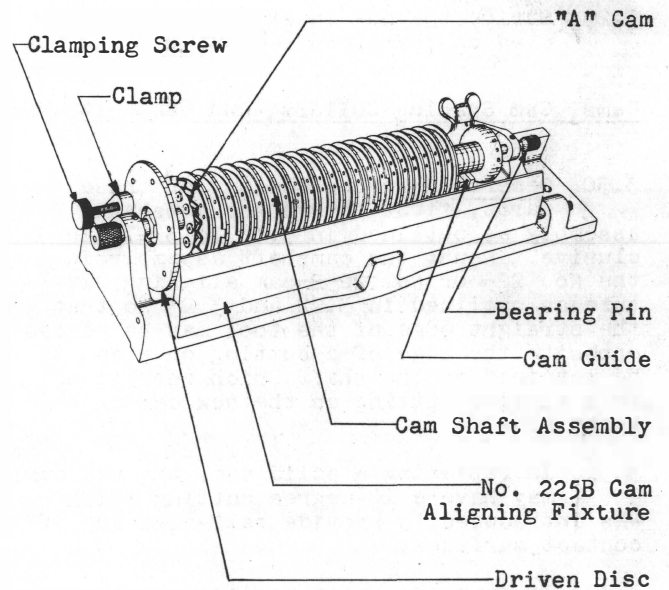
Method of Using the No. 225B Cam Aligning Fixture
